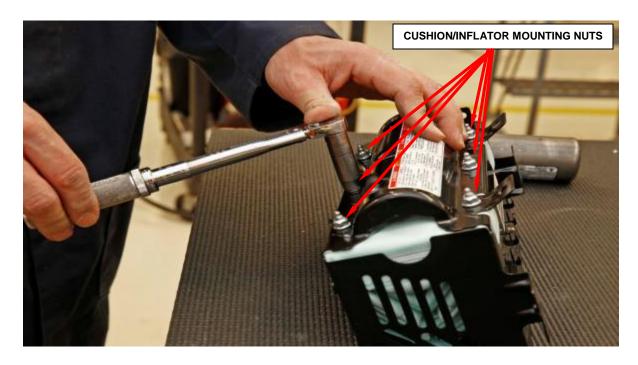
Cushion/Inflator Assembly Mounting Nuts
